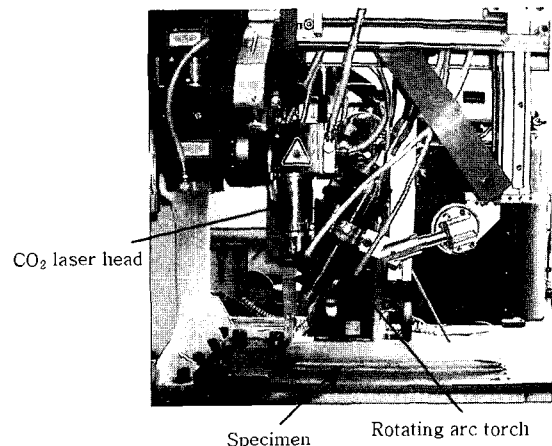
Photo of laser-rotating arc hybrid welding head
